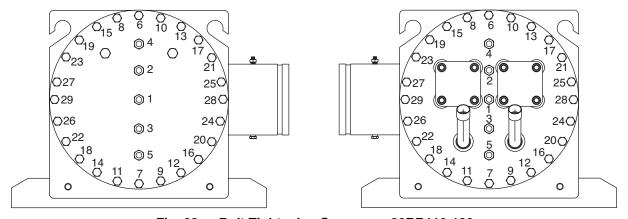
Bolt Tightening Sequence, 30RB110-130
